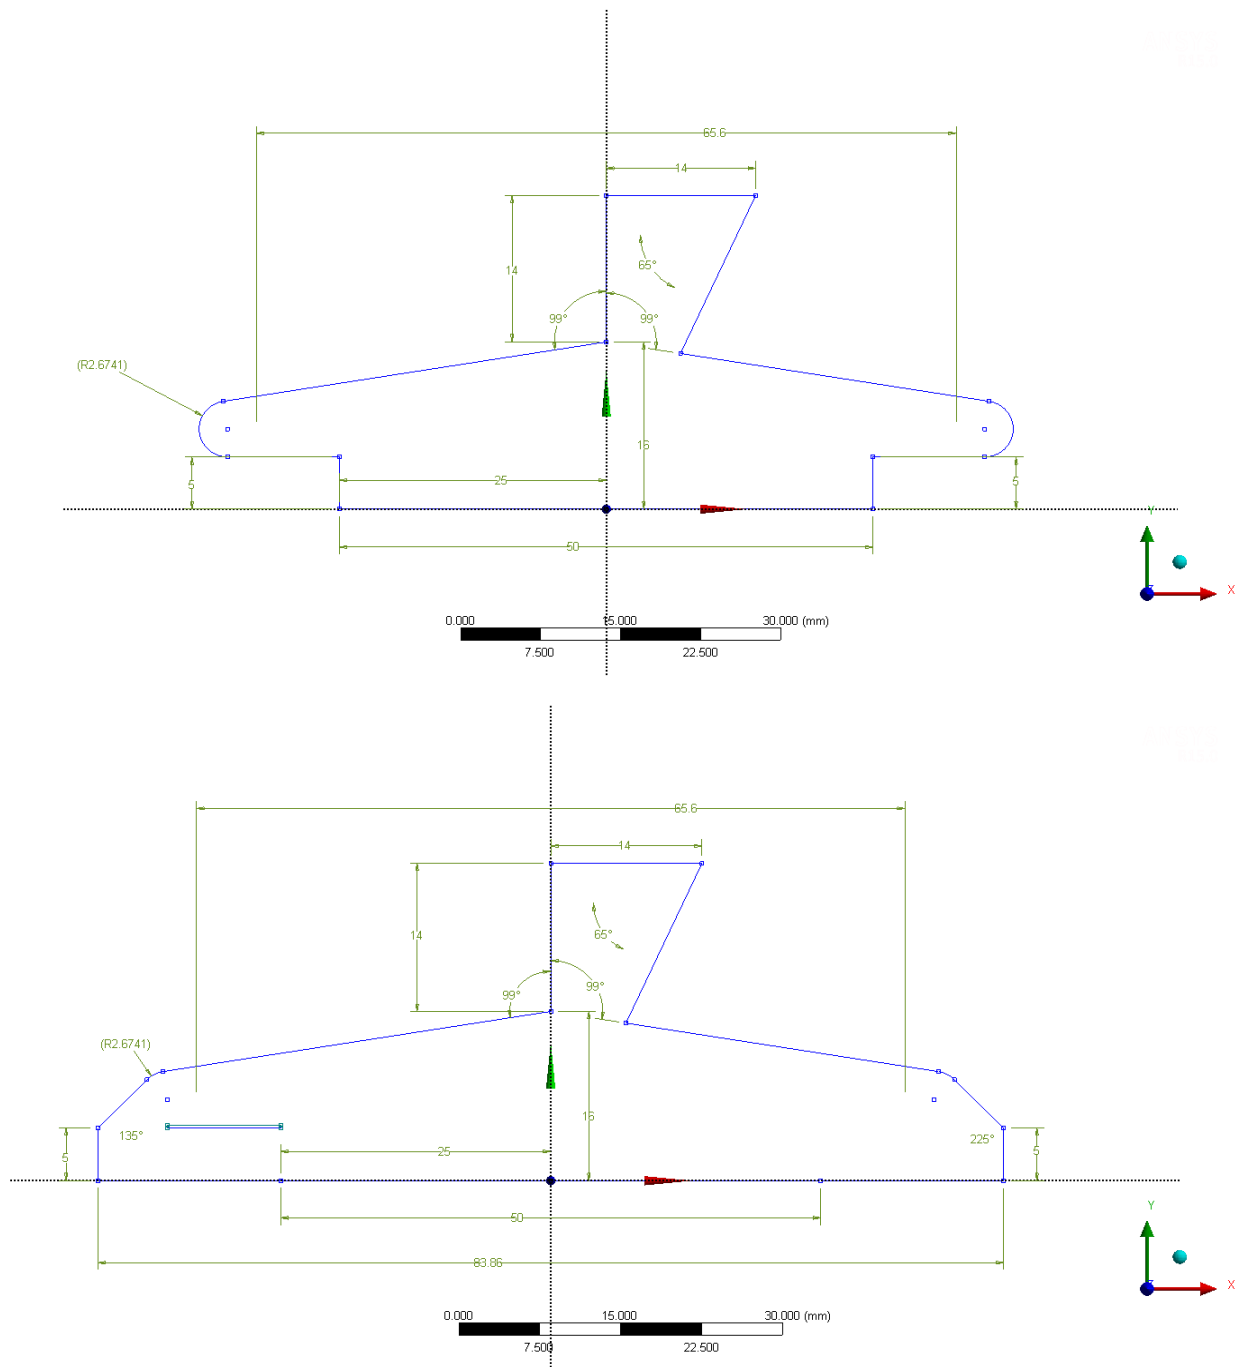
Band extrusion profiles for GRW tanker J2580 without and with fillet weld
